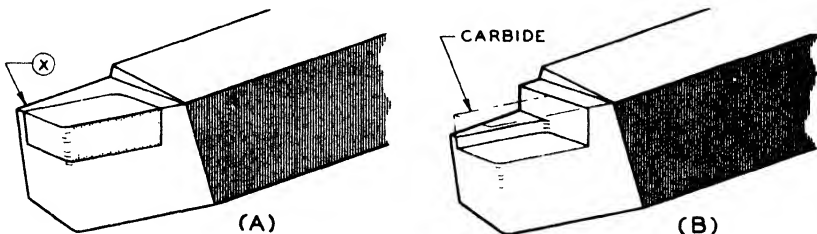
Tool Shank with a Thin Abutment (A) and a Modified Design with Reduced Recess Height (B)
